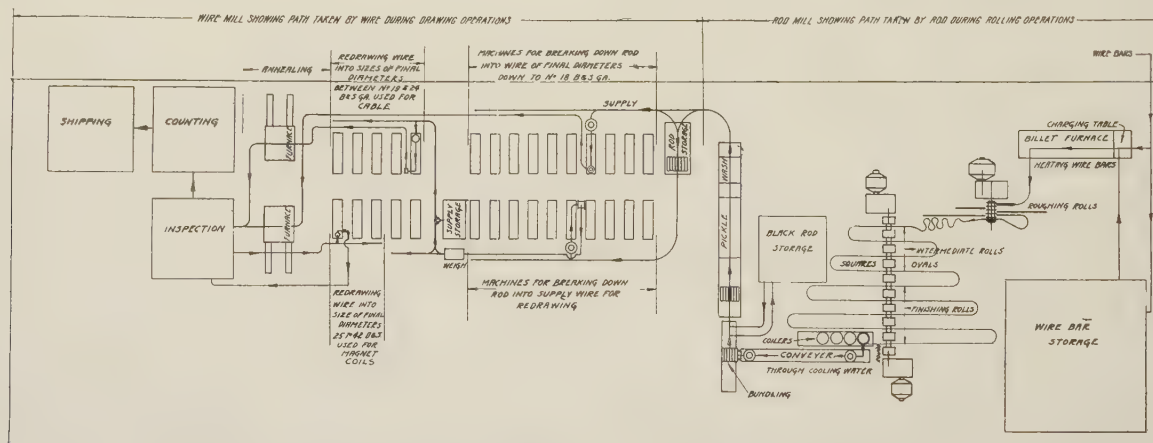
SCHEMATIC LAYOUT OF WESTERN ELECTRIC CO.'S COPPER ROD AND WIRE MILL AT CHICAGO
